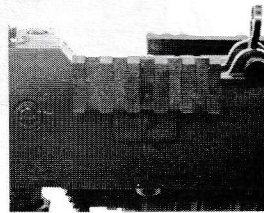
Mounting of MIL-STD-1913 Rail Assembly
